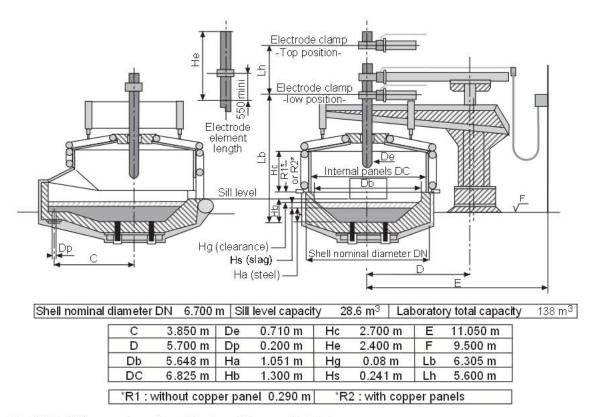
DC furnace dimensions. (Courtesy of Kvaerner Metals.)
